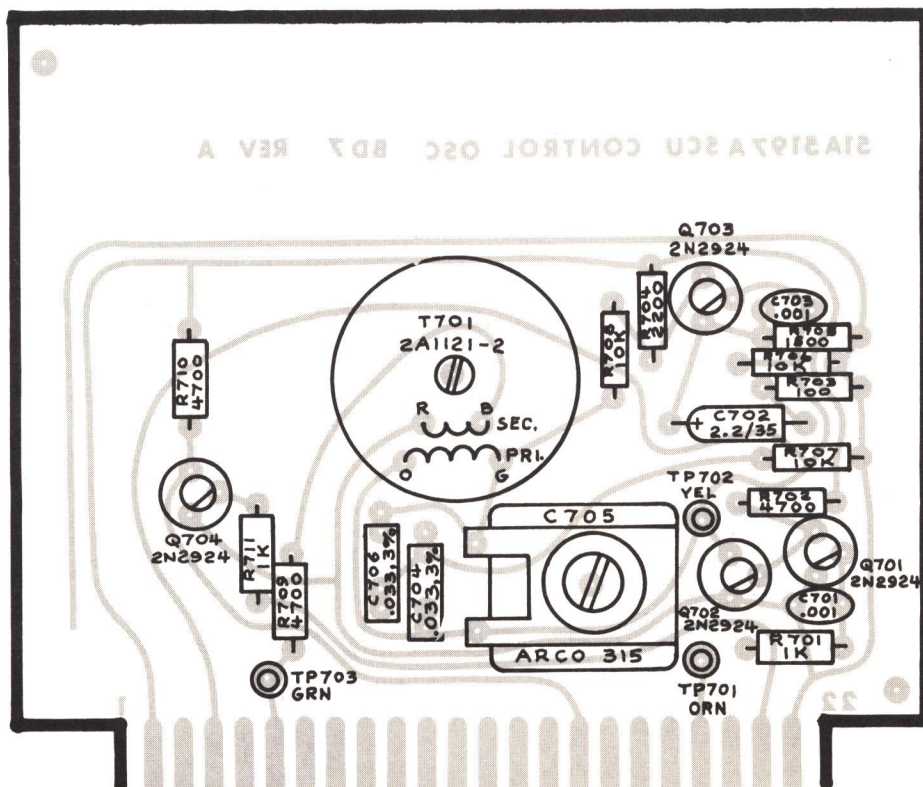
SCU Control Oscillator (Board 7), Parts Location
